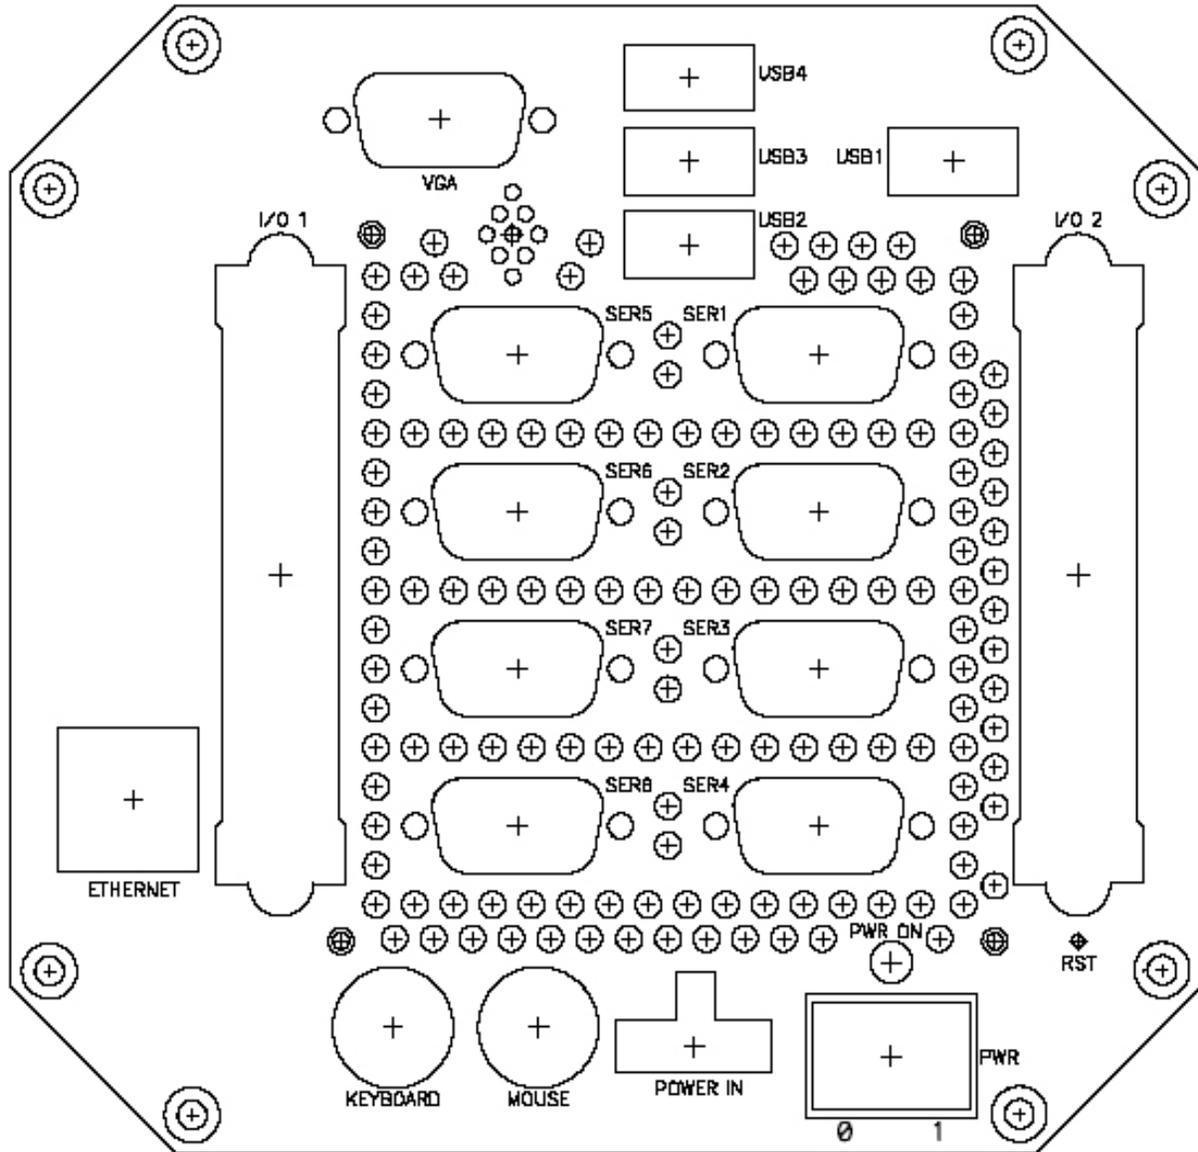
Top/Front End Cap Outline (DSC# PBEC-11-K)
